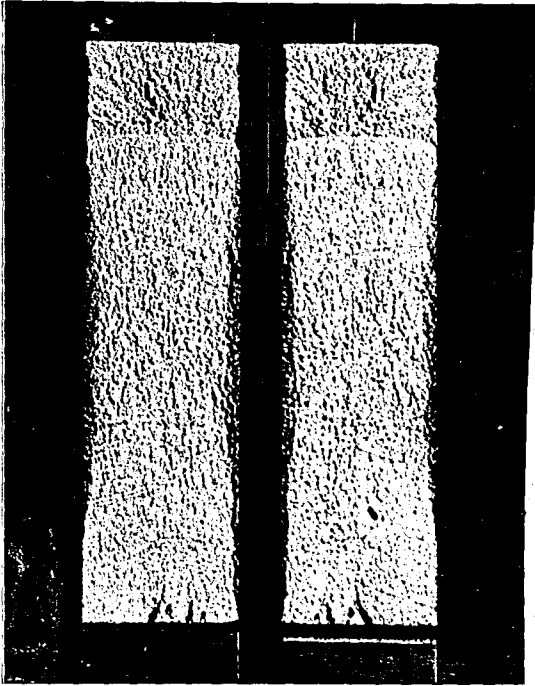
Fracture surfaces of specimen 4 (at displacement control)
